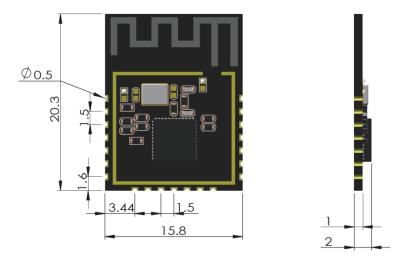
Module dimensions of HM-MT7201 without shield cover
